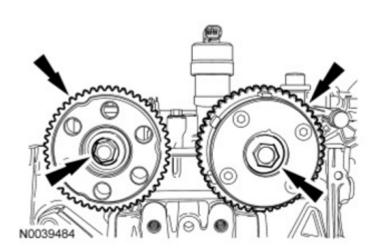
Locating Bolt And Camshaft Phaser And Sprocket Courtesy of FORD MOTOR CO.
